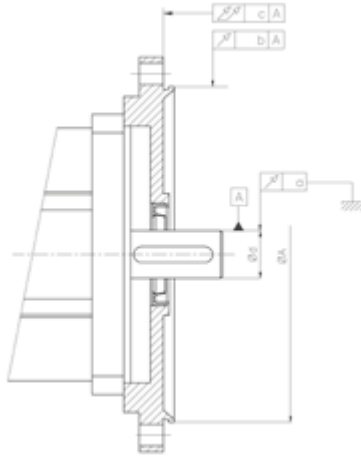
Dimensions of input and output flanges of the TwinSpin T series reduction gear
